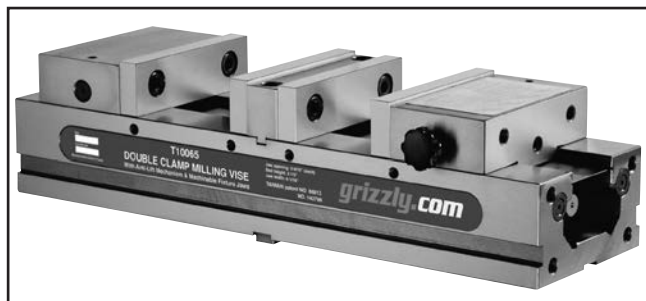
Model T10065 High-Precision Double-Clamp Milling Vise.
